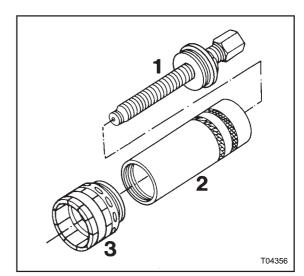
Tool set to remove cone and roller assembly of inner bearing
